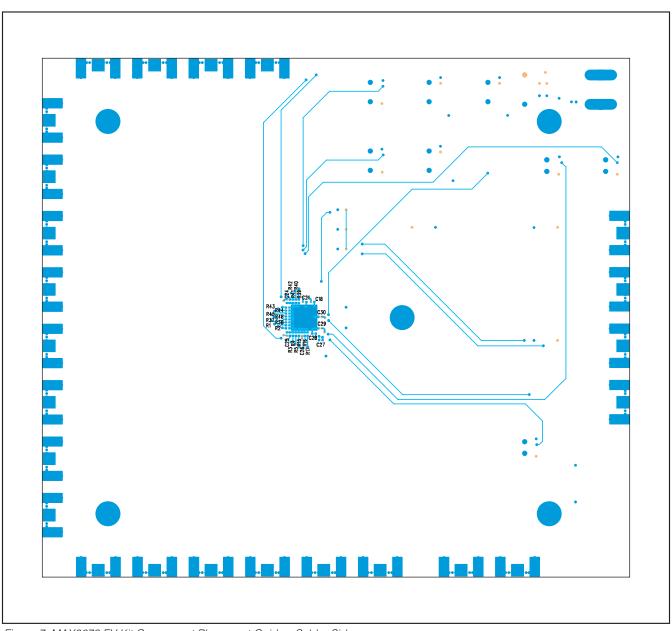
MAX3673 EV Kit Component Placement Guide—Solder Side
